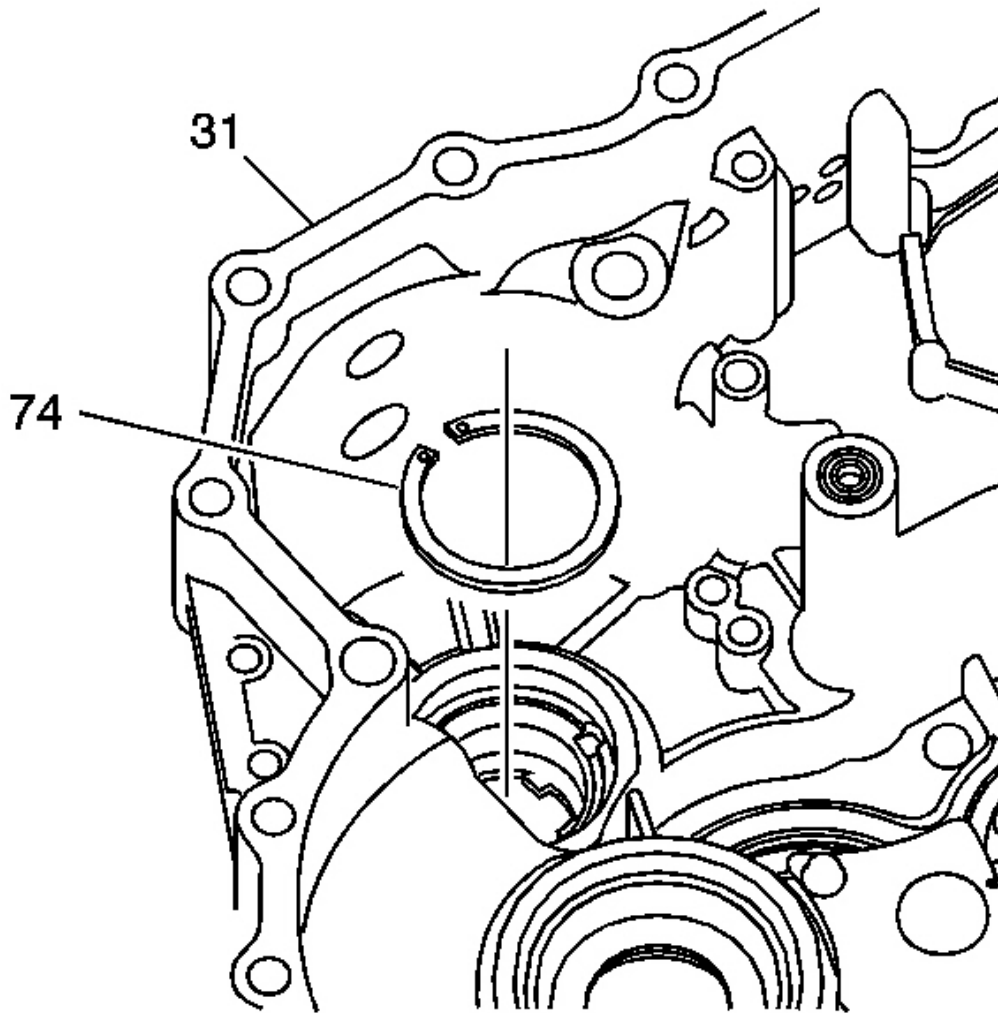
1st/2nd Clutch Shaft Shim & Transmission Case
